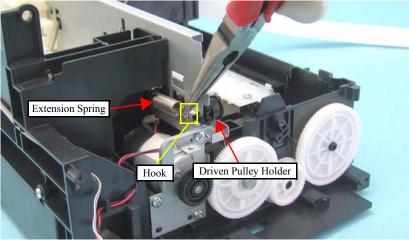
Removing the Extension Spring and Driven Pulley Holder
